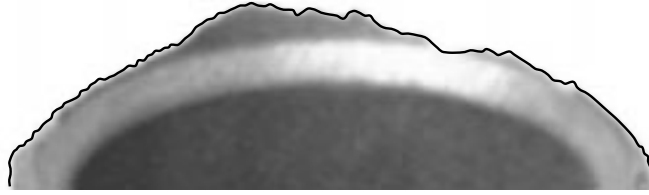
The profile of an edge on a casting. The contour to be grinded is marked with a solid line.
